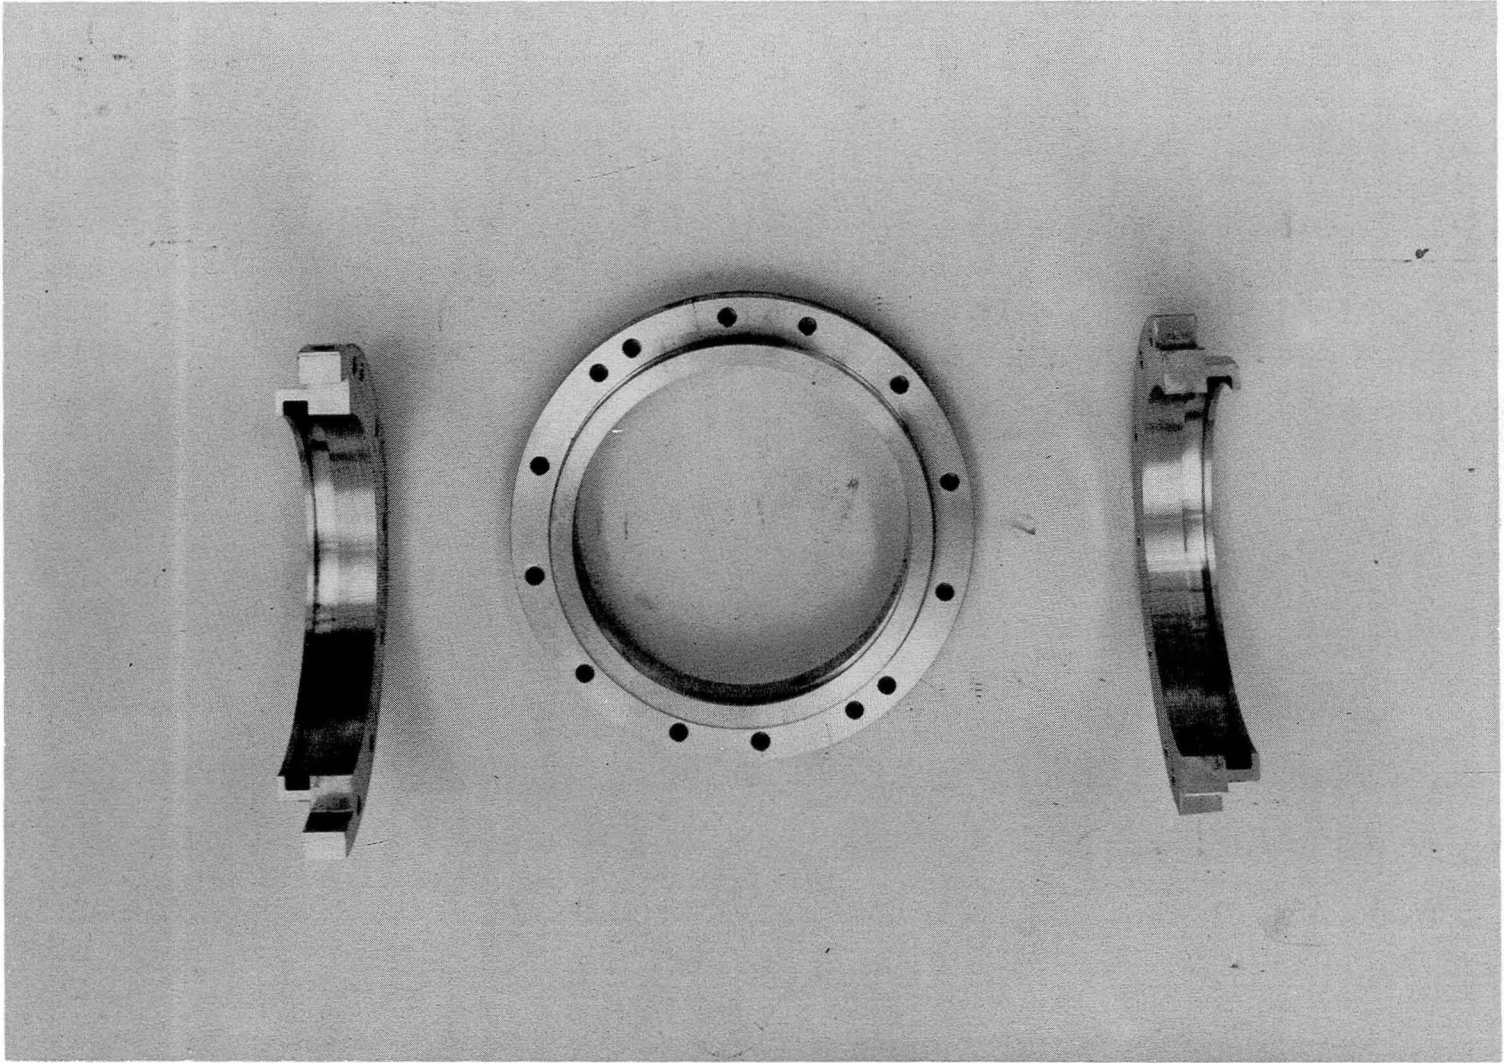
Split Support O-Ring Holders for Test Shaft Damper
